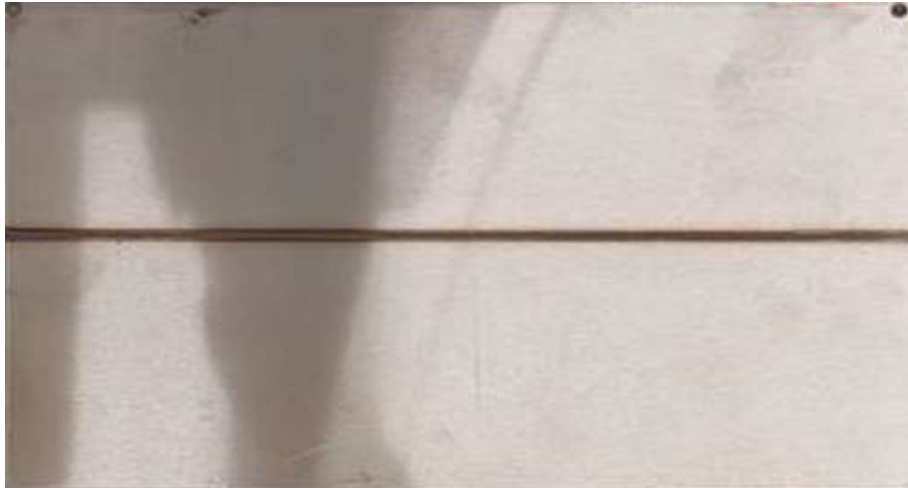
Assembly drawing of sheets with straight weld bead.
